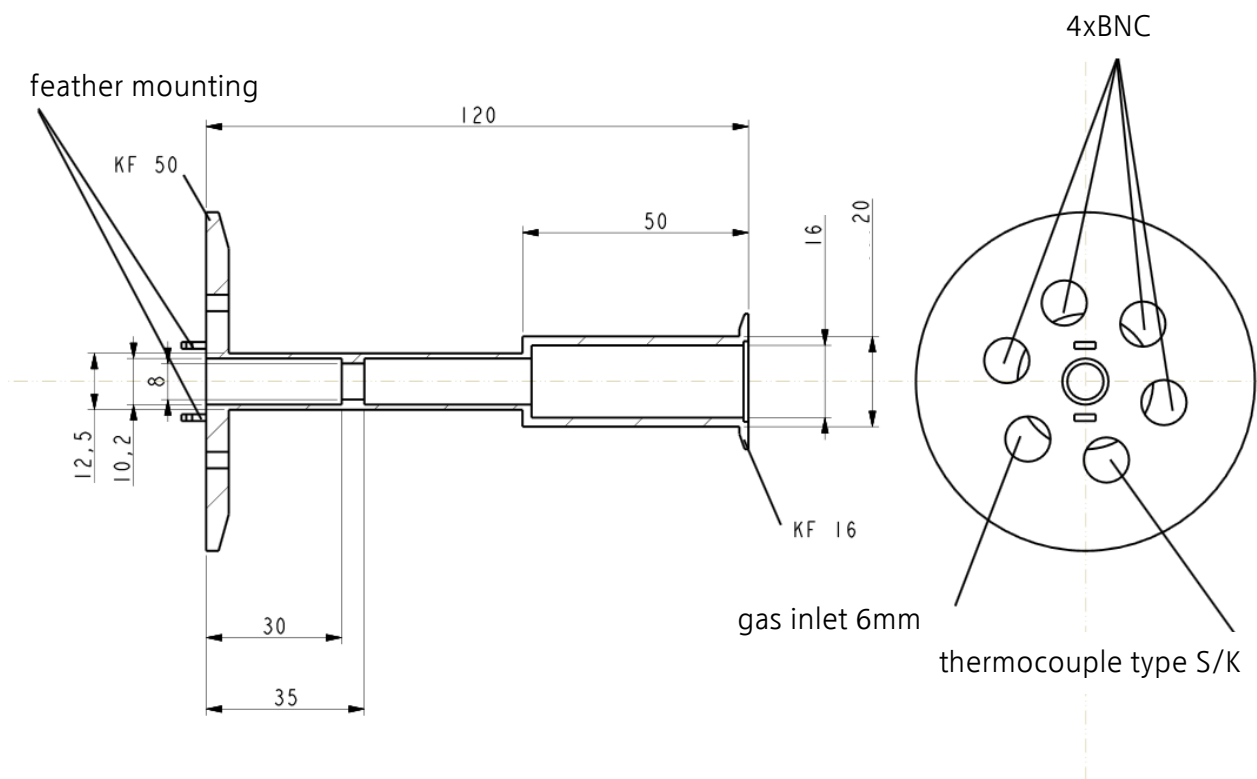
Stainless steel vacuum flange with thermocouple type S compensation feed through.
